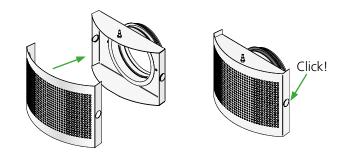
Assembling the front, press the front straight towards the wall plate unit it snaps into position.
